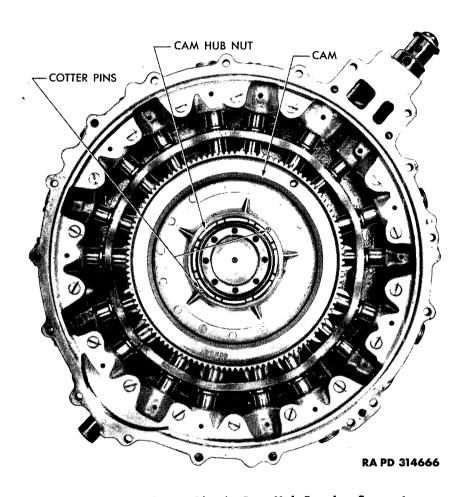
Cotter Pins in Cam Hub Bearing Support
